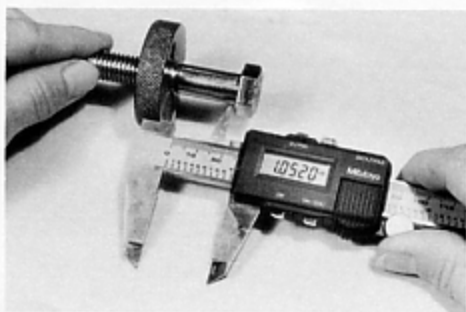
Measuring " L_G max" with non-counterbored Go ring gage and caliper.
